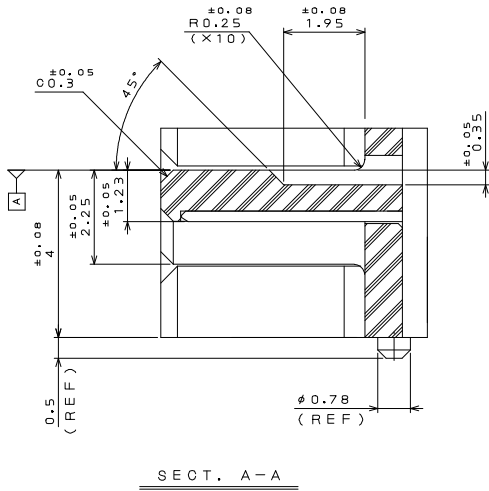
7.0 mm Slimline device plug connector interface dimensions Section A-A
